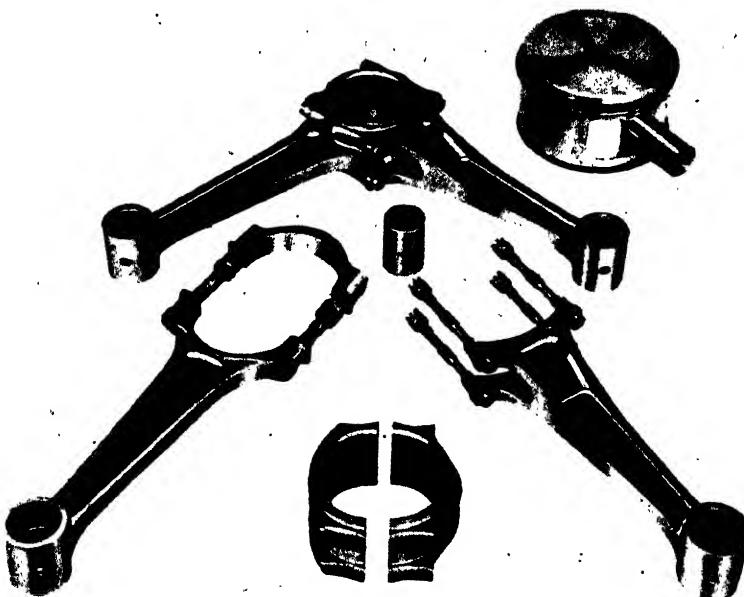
Piston, Connecting Rod and Big End Assemblies.
